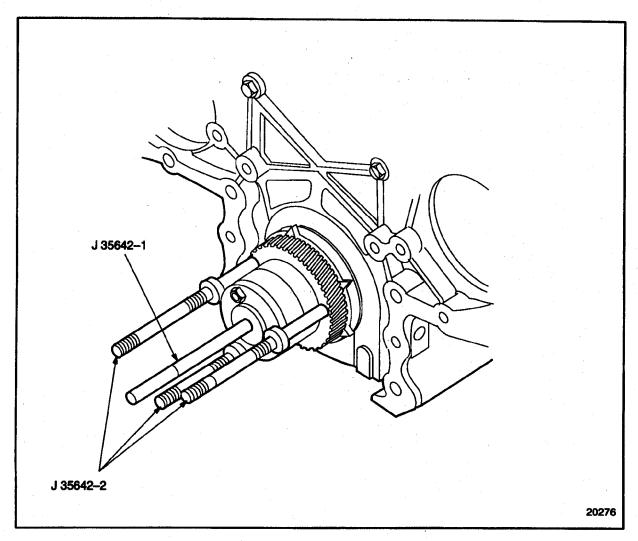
Installation of Crankshaft Timing Gear Removal Tools
